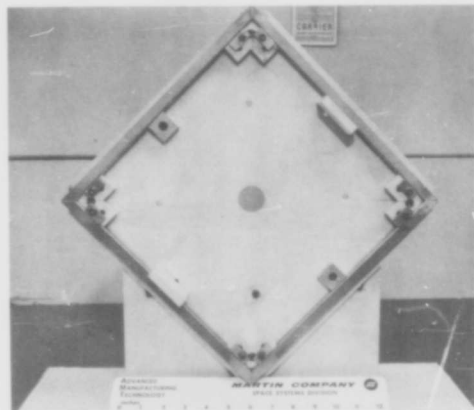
Matching the Straight U-Channels to the Tool for Electron Beam Welding of the Miter Joint
